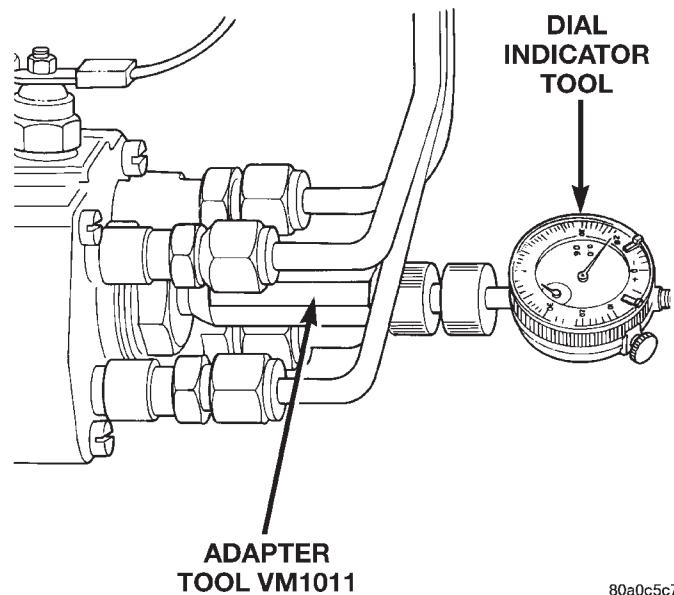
Installing Dial Indicator and Special Adapter Tools
